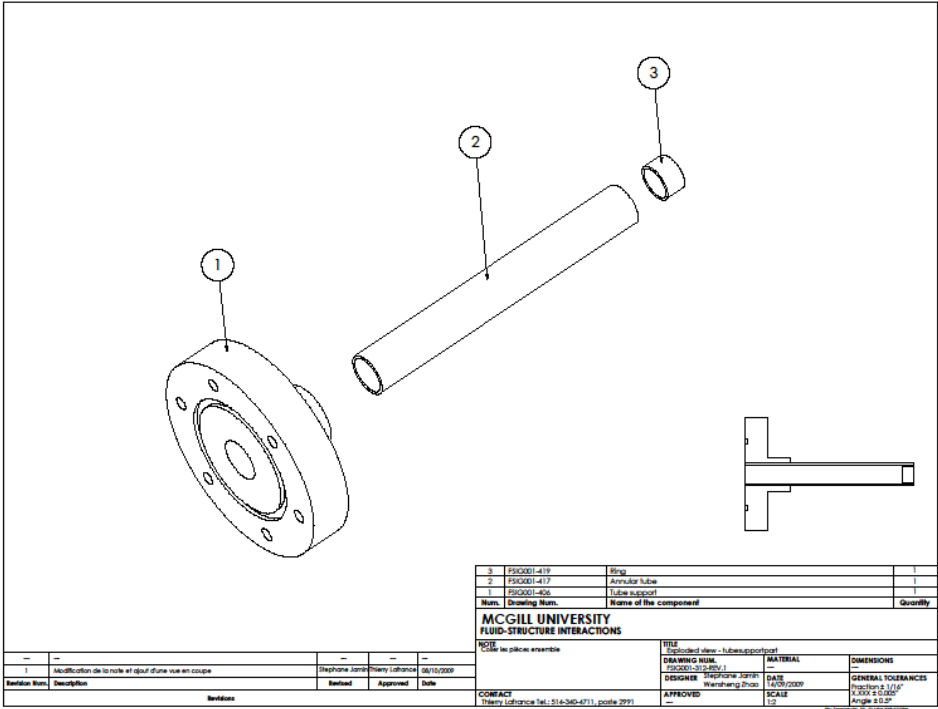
Sub-assembly drawing for the vessel: Tube support part
